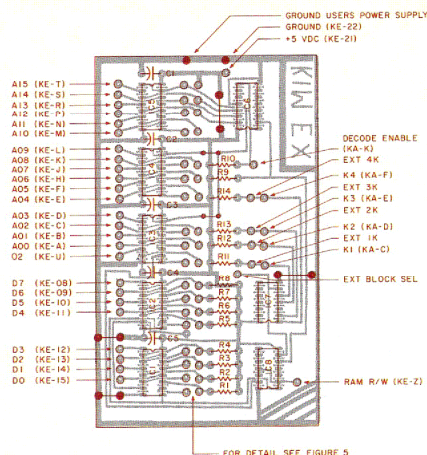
Parts-placement and wiring diagram for connections on the KIM Expander Board.
